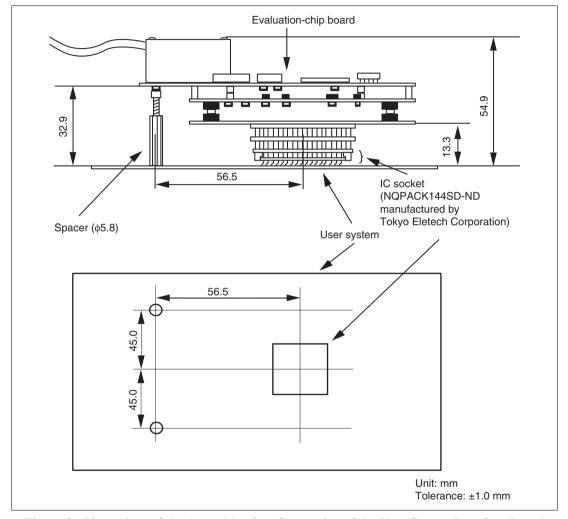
Dimensions of the Assembly after Connection of the User System Interface Board
